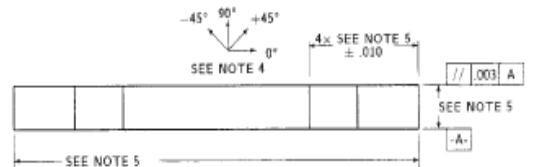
Tension Test Specimen Drawing (inch-pound)
